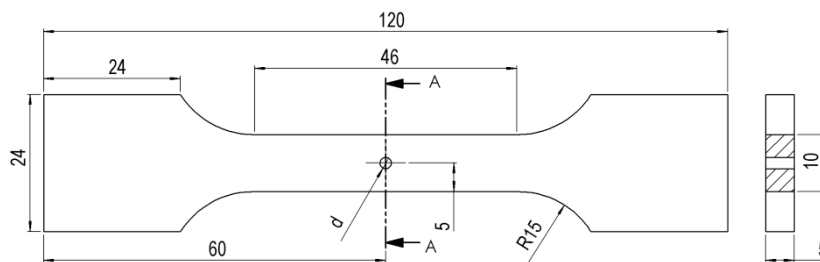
Dimensions of the bulk specimen with detail of notch (internal drilling)
